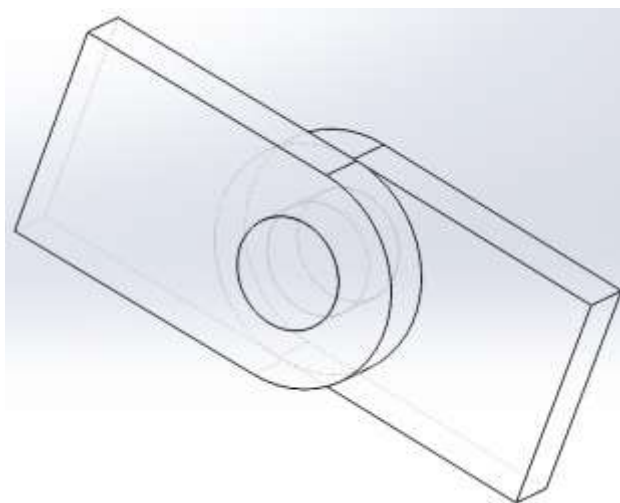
Assembly of the contacting parts of the elements subjected to load in the mechanism
